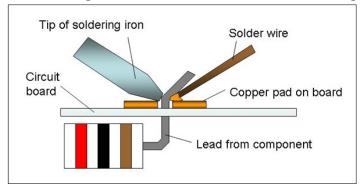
The tip of the soldering iron heats both the copper pad and the lead from the electronic component. Solder melts when placed in contact with the hot metals to be joined.
